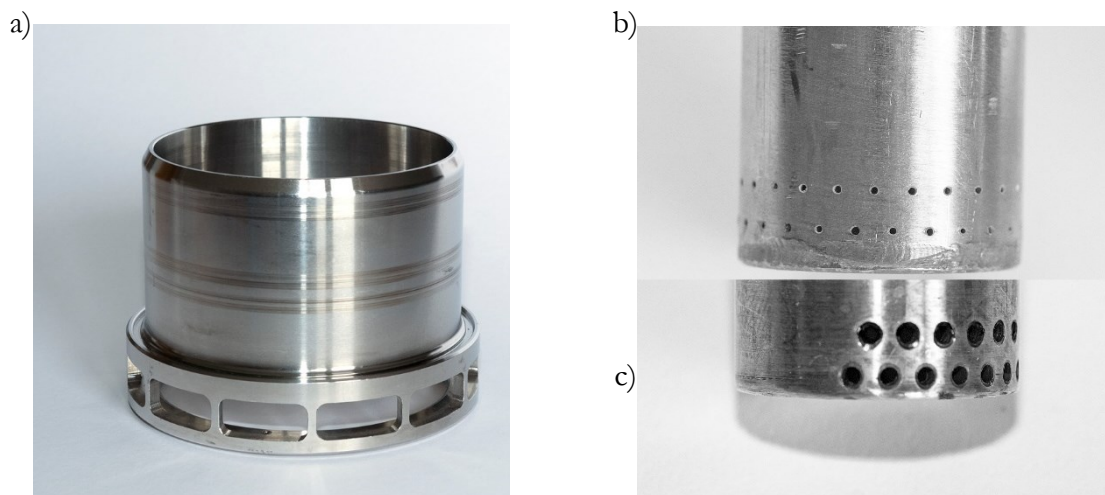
a) Packing support ring placed in the center of the rotor b) distributor 360° spraying angle 0.8 mm boreholes 24 holes per row (15°-hole circle division) c) distributor 90° spraying angle 1.6 mm boreholes 13 holes total in two rows (15°-hole circle division). Outer distributor diameter 25 mm.
